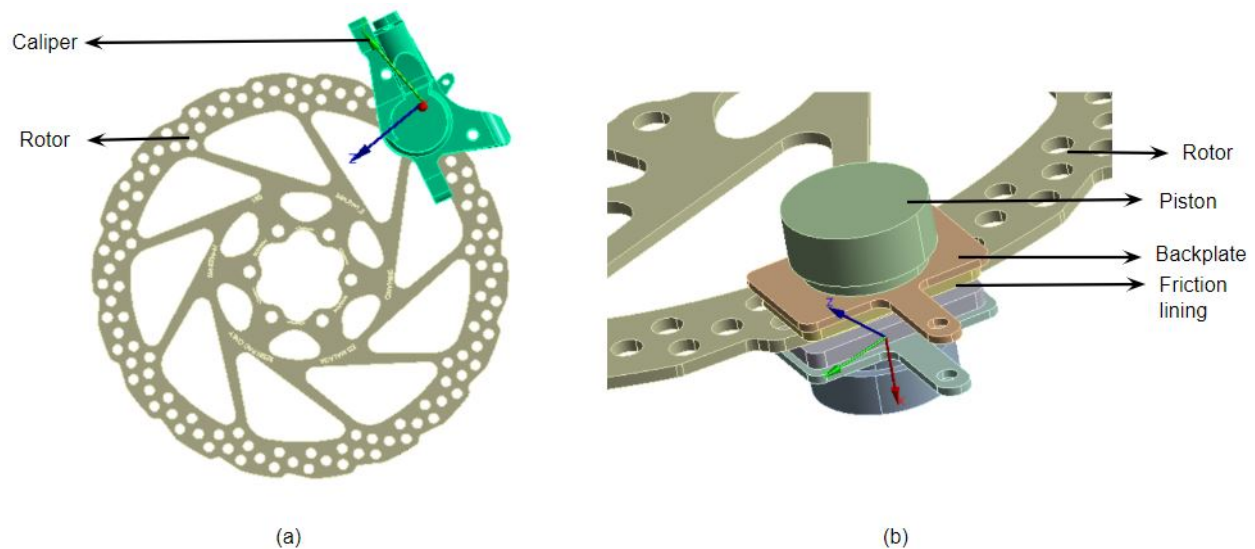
Finite element model of the brake assembly (a) Rotor and Caliper (b) Zoomed in Rotor, Caliper pistons, Backplate, and Friction lining
